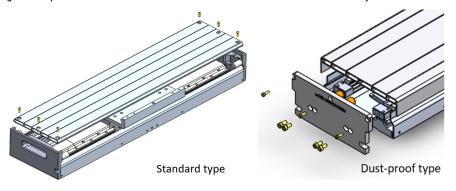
Exploded view of the cover - here for an LMSSA 18/20 linear motor system
